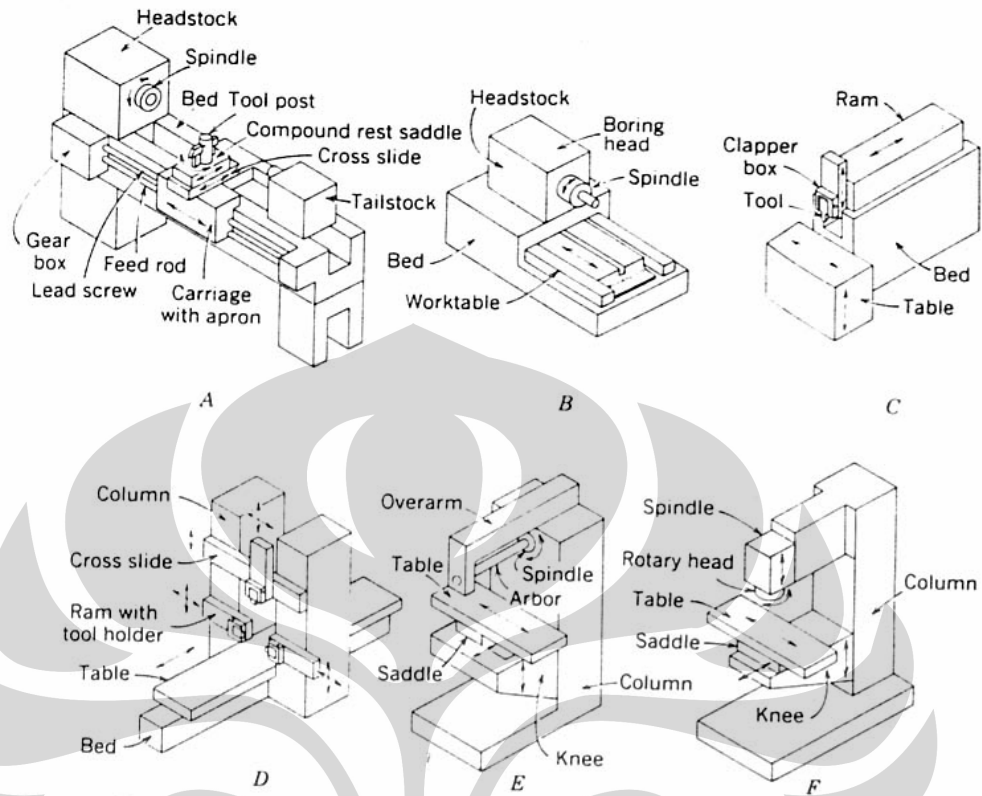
Basic structural elements in conventional machine tools. *A*, Lathe. *B*, Horizontal boring machine. *C*, Shaper. *D*, Planer. *E*, Horizontal milling machine. *F*, Vertical milling machine.
